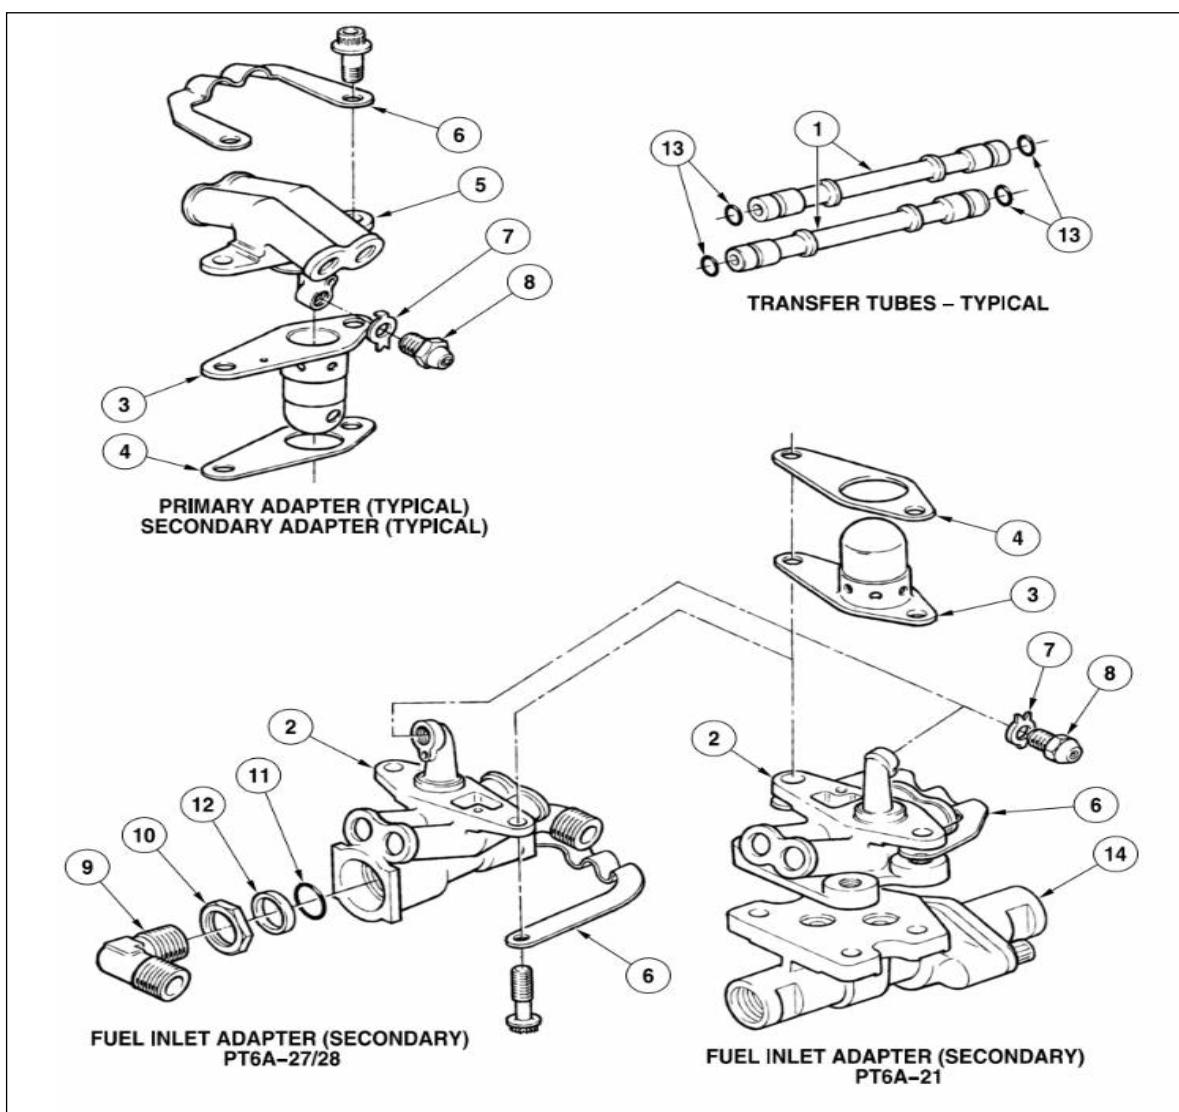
Removal/ Installation of Fuel Manifold Adapter
